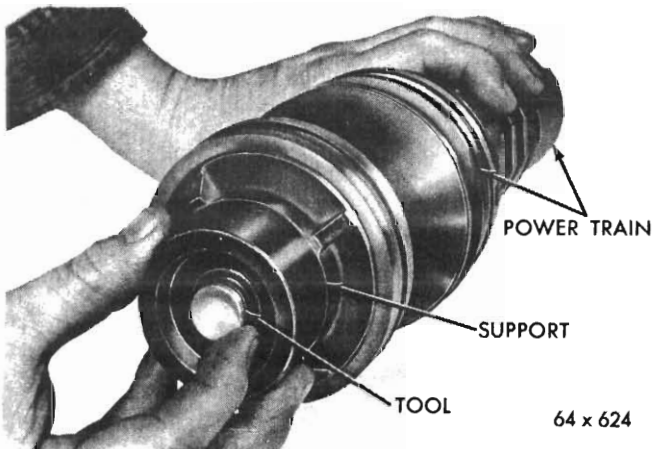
Retaining bearing rollers with Tool E19C25B (typical)
